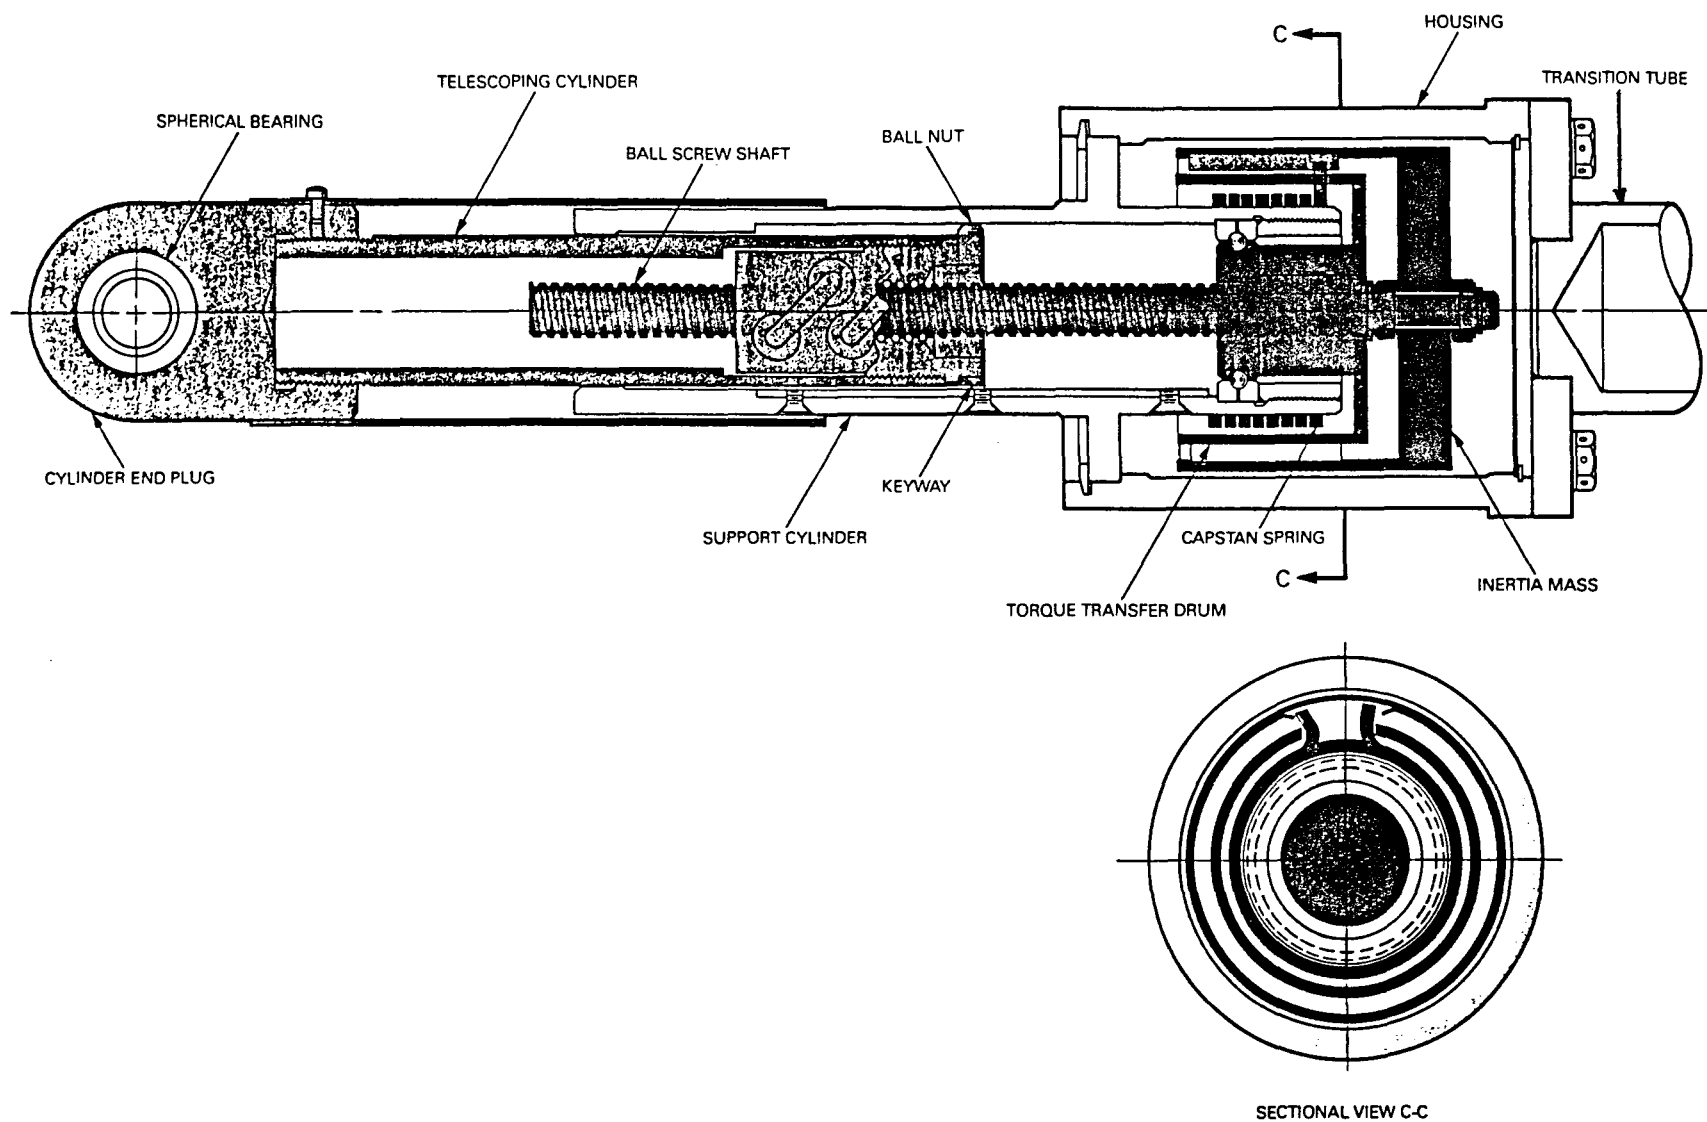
MECHANICAL SNUBBER ASSEMBLY
